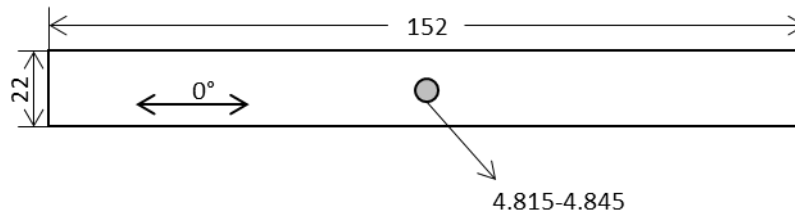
Coupon geometry for compression test - FHC coupon, according to AITM1-0008. All dimensions are expressed in mm.
